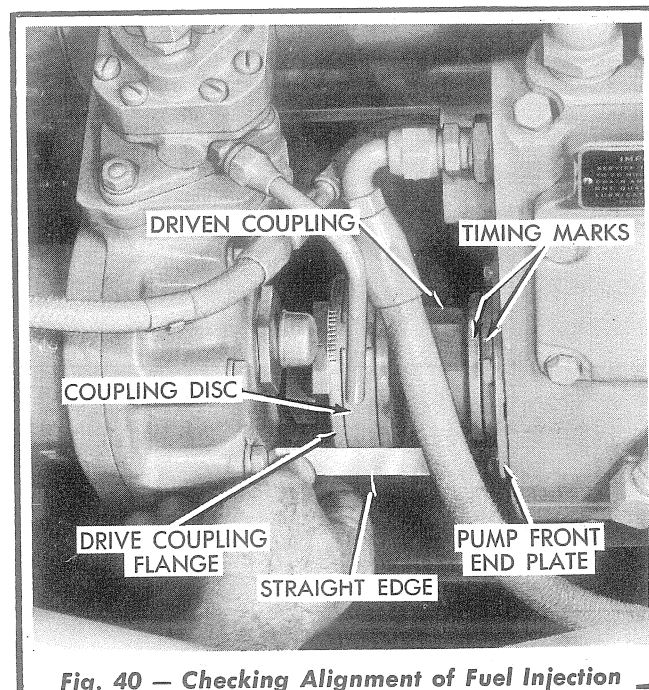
Checking Alignment of Fuel Injection Pump (Tractors Prior to Serial No. 4001)
